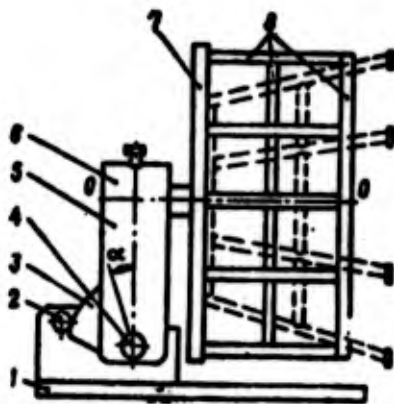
Diagram of a device for the welding of frames: 1 - base; 2 - turn mechanism; 3 - sector; 4 - axle; 5 - brace; 6 - bearing; 7 - disk; 8 - basket.
